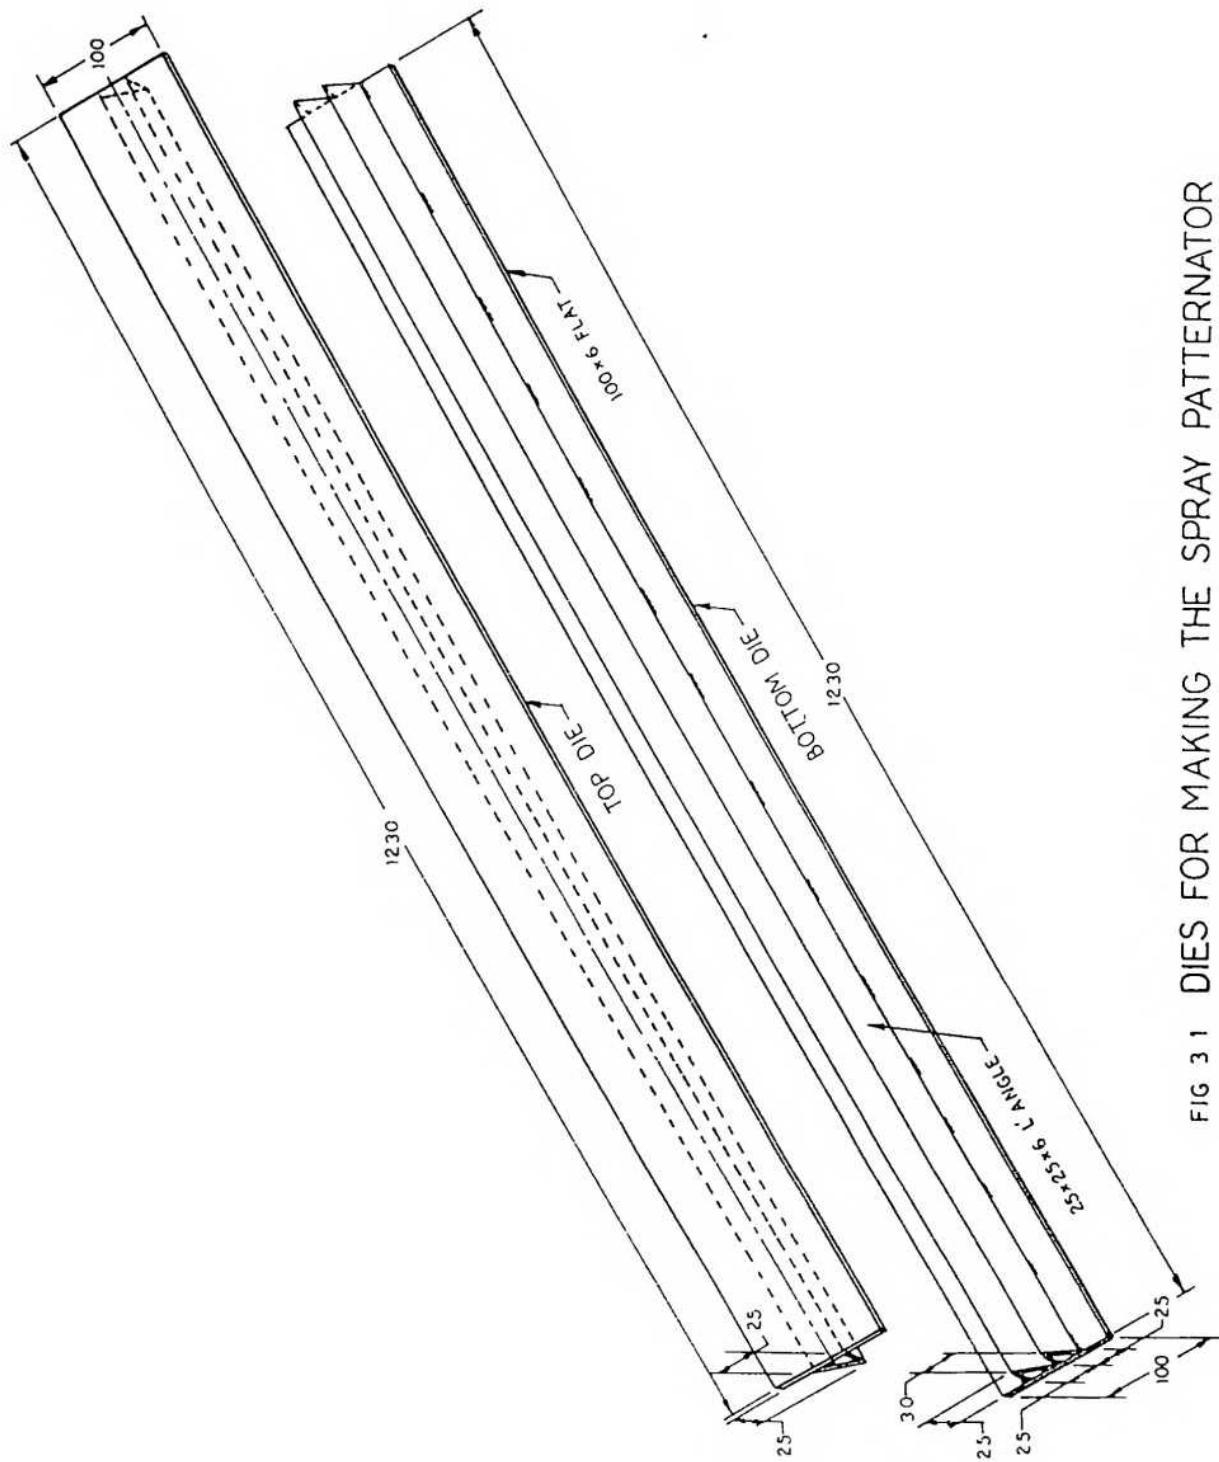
1 DIES FOR MAKING THE SPRAY PATTERNATOR
